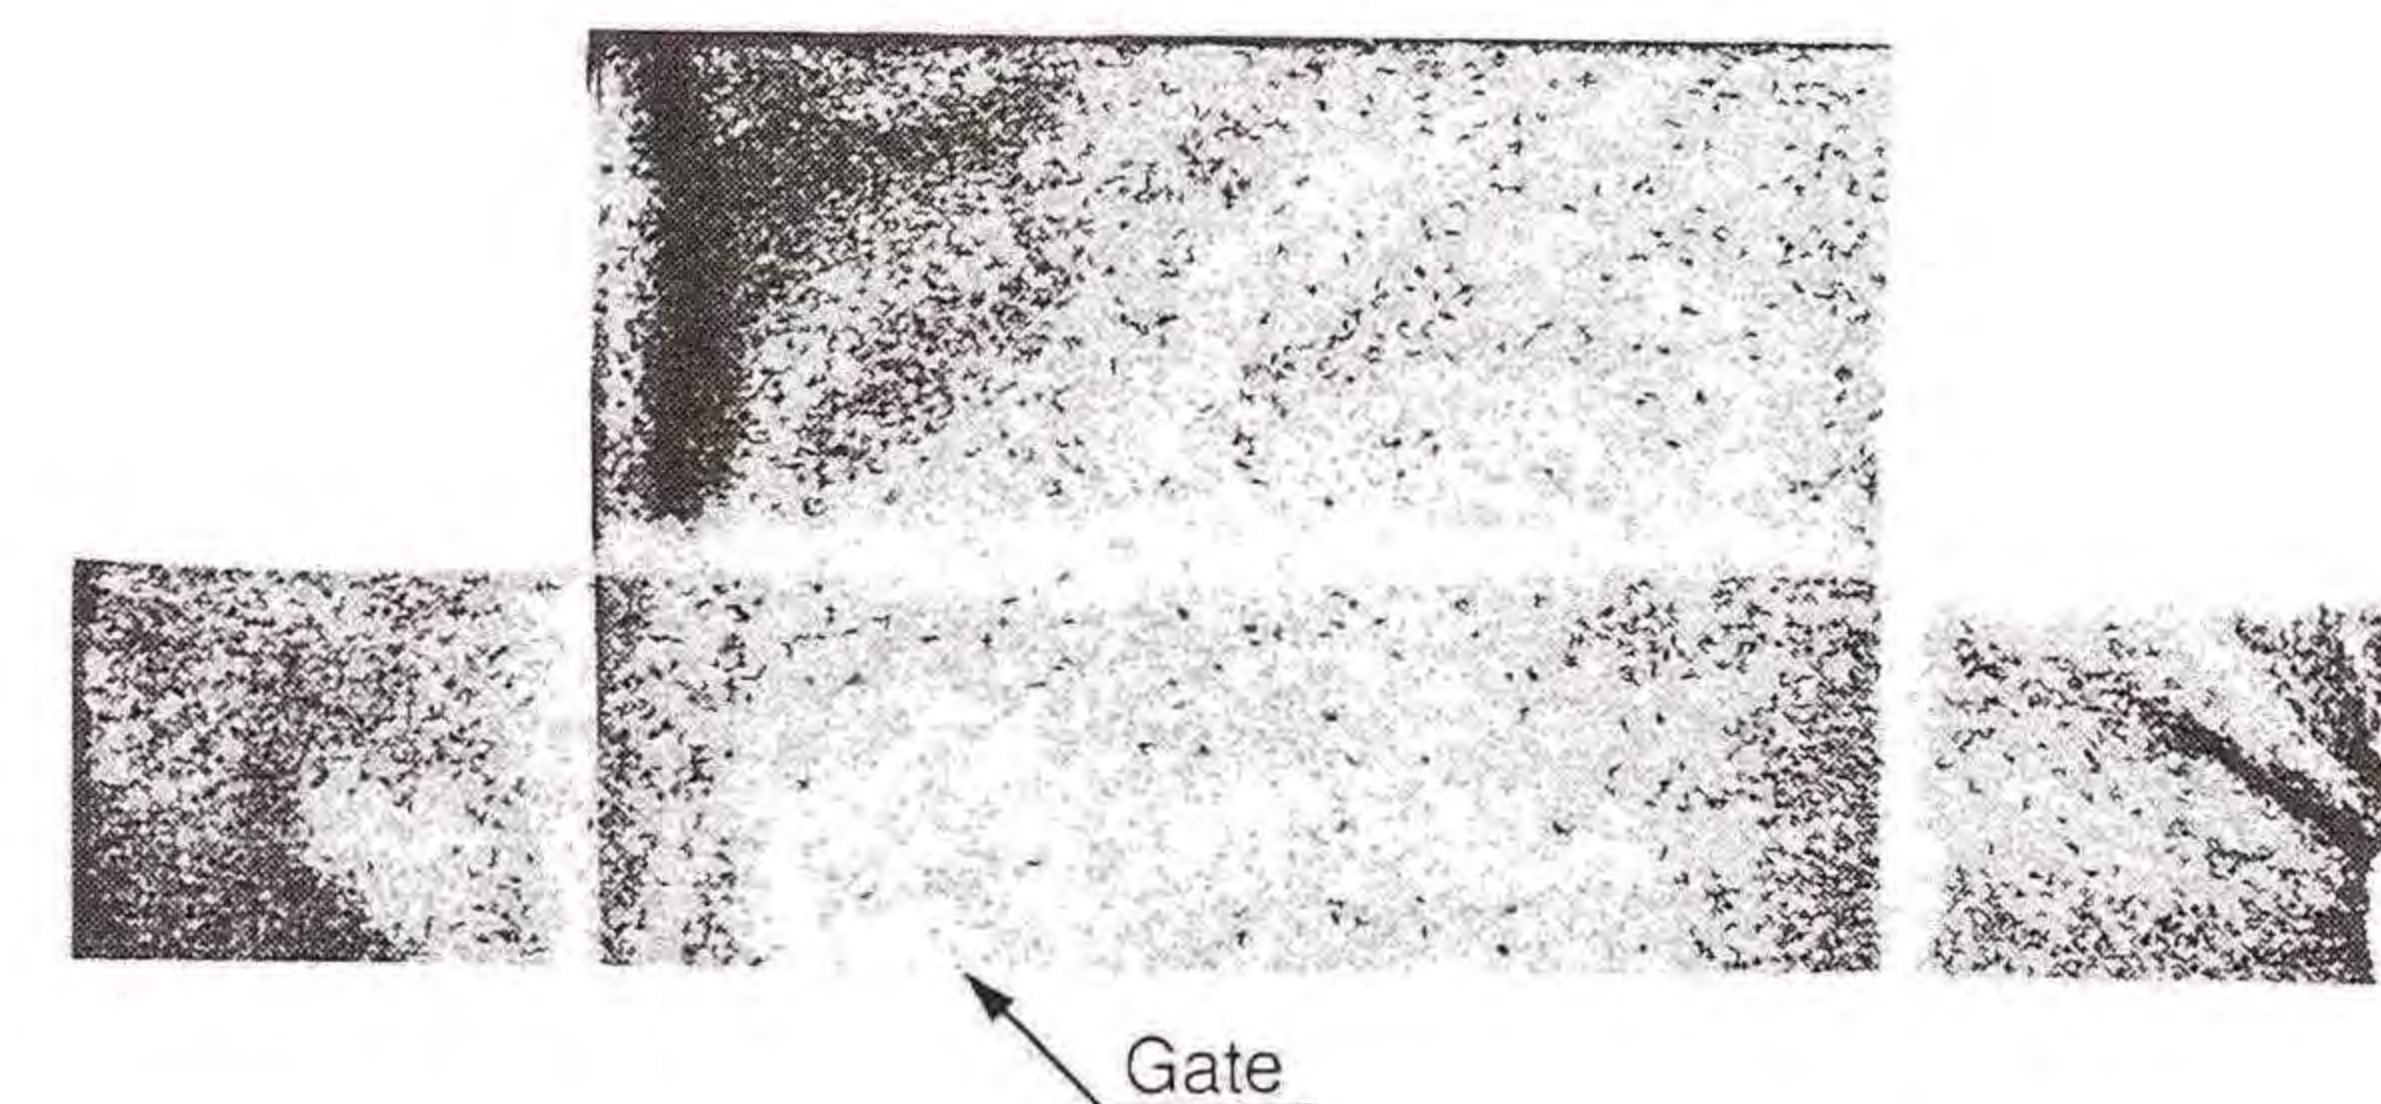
Soft X-ray photographs of injection molded test piece. (Eccentric distance = 25 mm)
